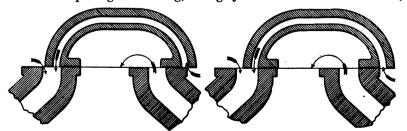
Trick Valve Showing Admission of Steam Just Beginning
